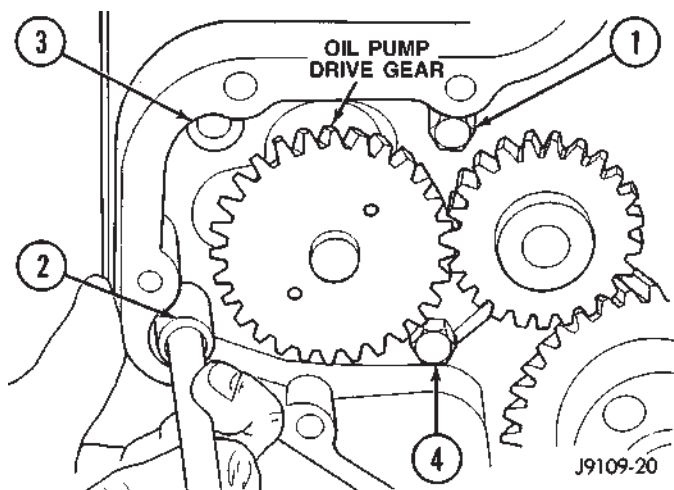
Oil Pump Mounting Bolt Torque Sequence
